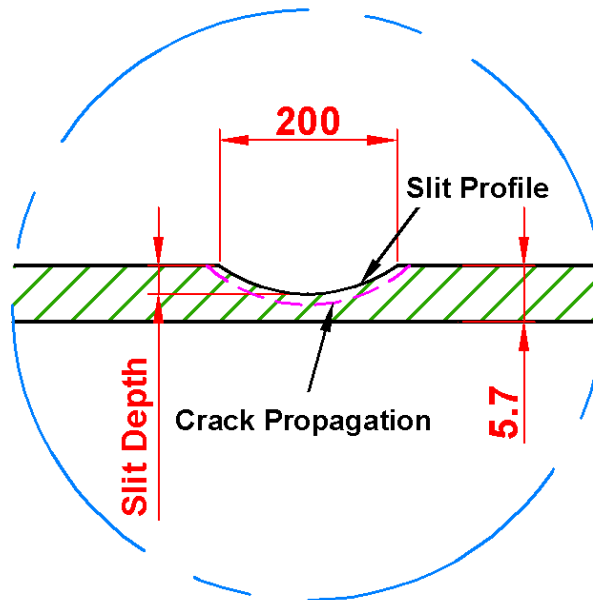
Machined slit, and crack after cyclic loading
